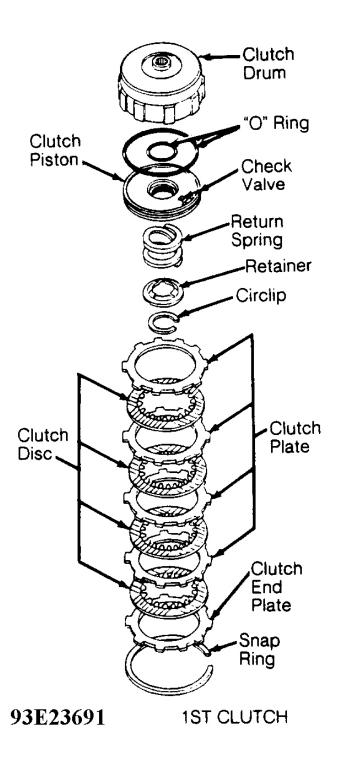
Exploded View Of 1st Clutch Assembly Courtesy of AMERICAN HONDA MOTOR CO., INC.
